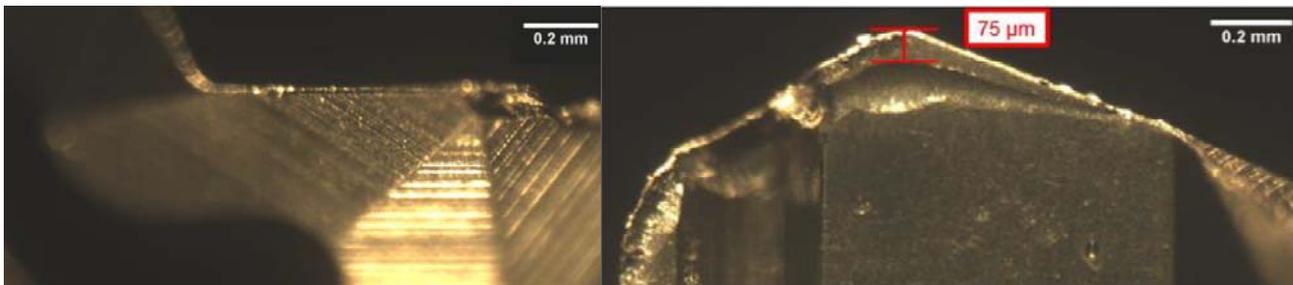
Automatic honed tool after drilling 250 holes, flank (a), rake face (b).
